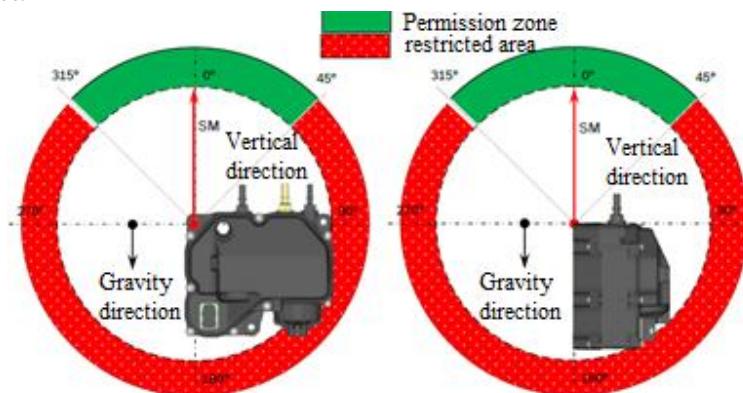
Instructions to installing Urea pump in front elevation (left) side elevation (right).
